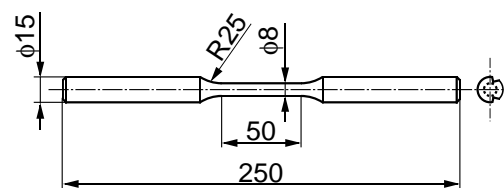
Shape and dimensions of smooth test specimens. All dimensions are in mm.
